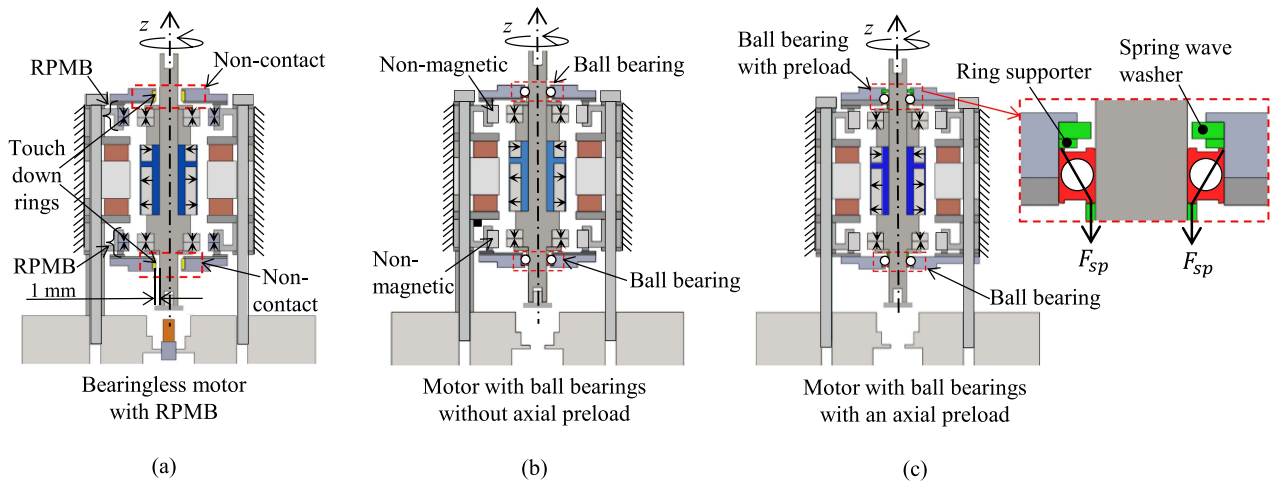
Three variations in the test motor: (a) bearingless motor with RPMB; (b) motor with ball bearings without an axial preload; and (c) motor with ball bearings with an axial preload. Since only one rotational shaft was fabricated for the three variations, the unbalance mass was identical.
